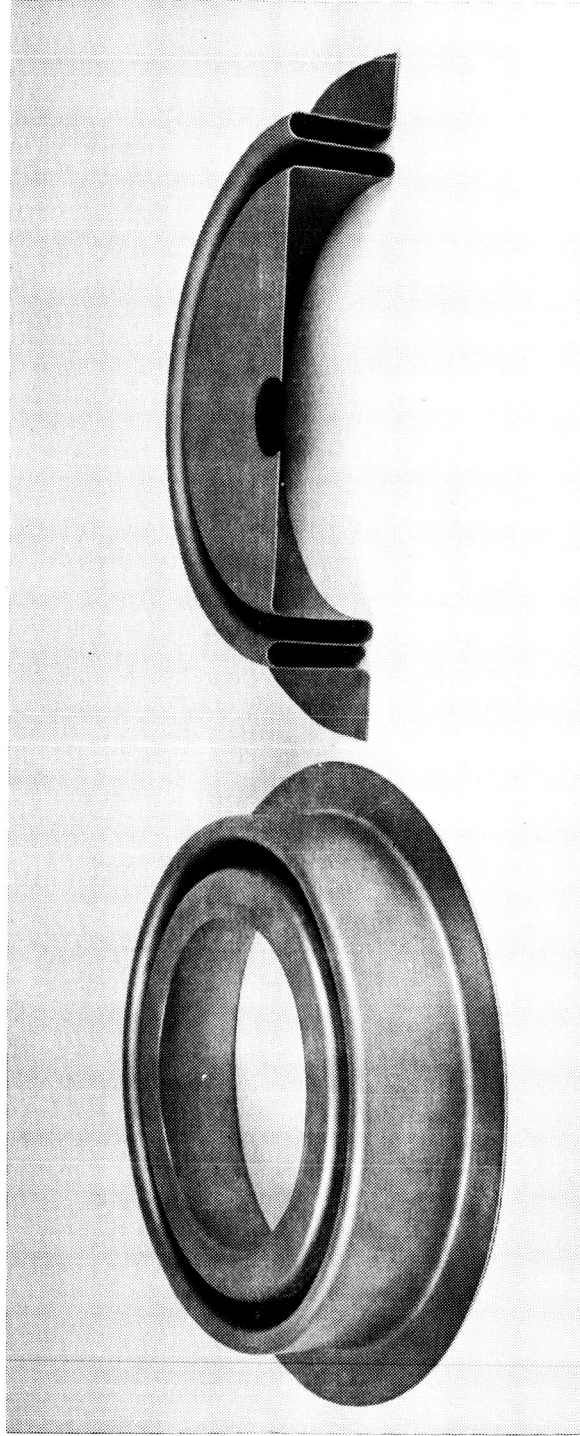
Finish Formed Forward Bellows and Sectional Test Part
